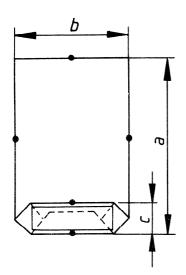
Open-mouth pasted flat hexagonal bottom sack
